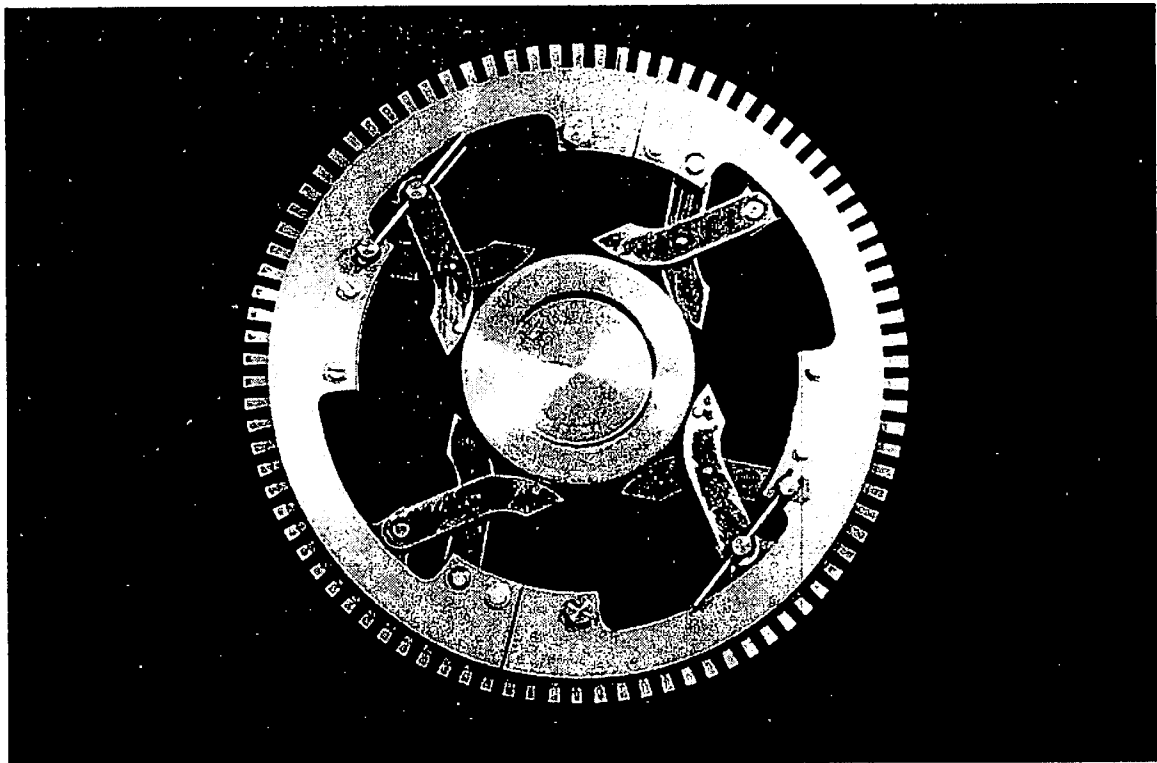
Divisible chopper disk, shaft diameter 80-120 mm, fully assembled
